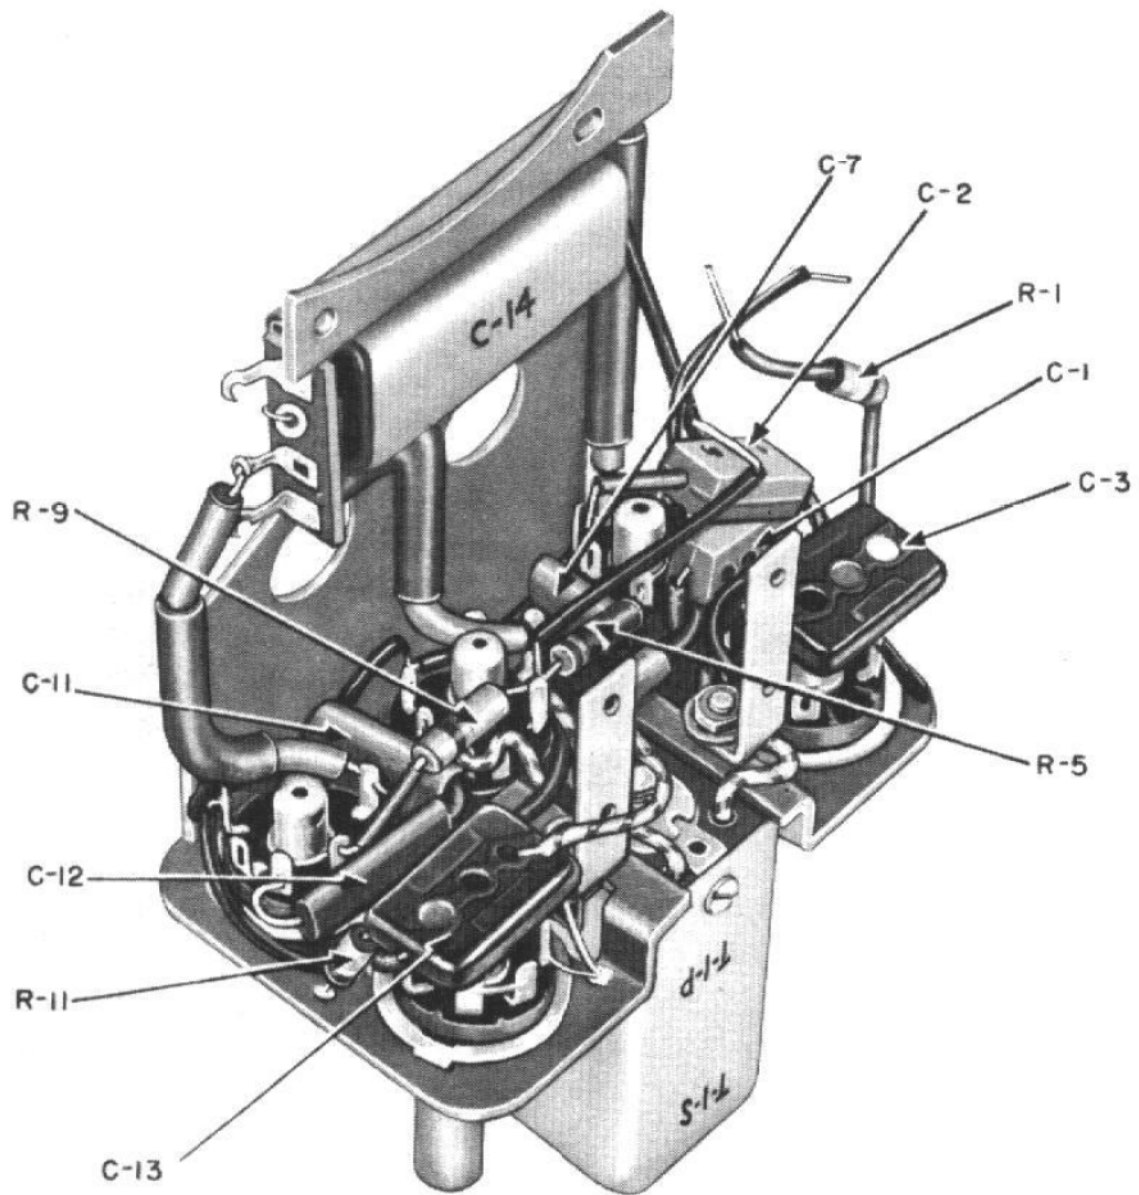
Vacuum Tube Shelf, view showing socket wiring
